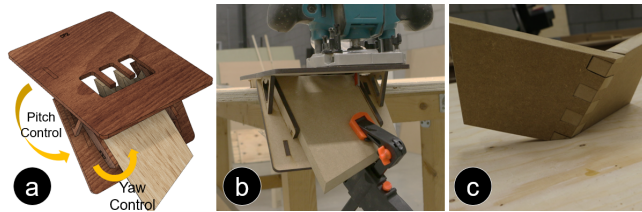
Making highly intricate finger joints using a computationally fabricated jig.
